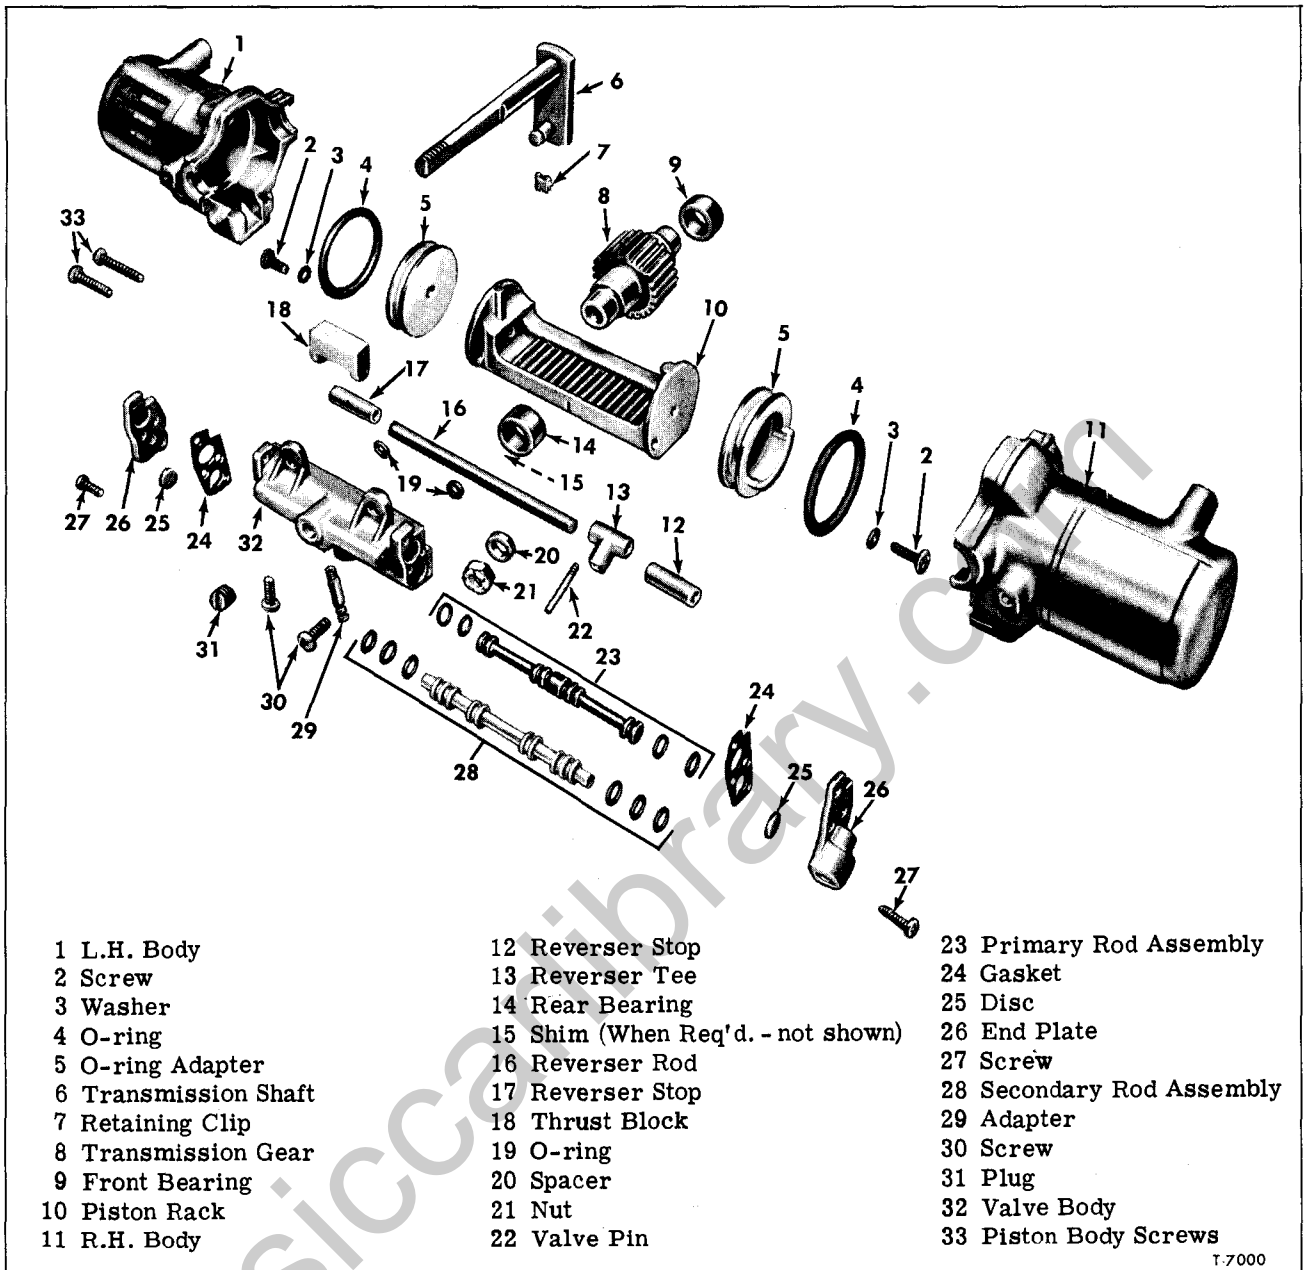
Windshield Wiper Motor Components (Series 90 Alum. Tilt Cab)
